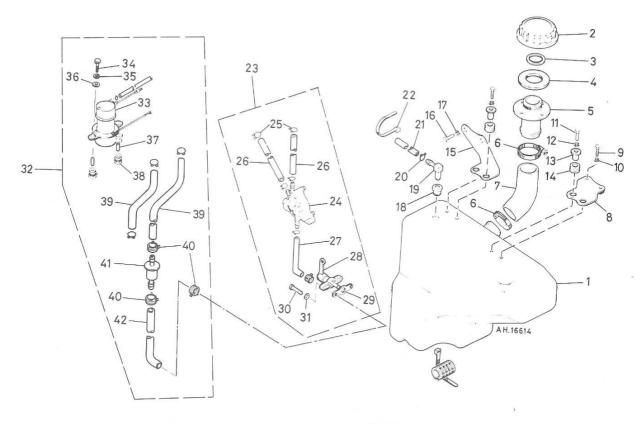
Fuel tank and pump - KLT250 (Sec 2)
